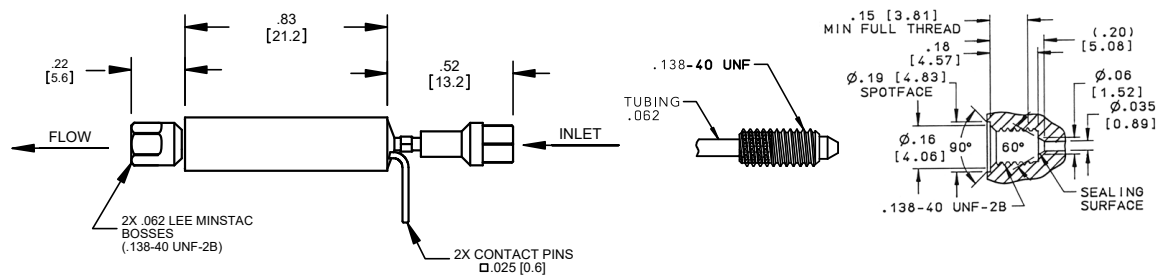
Technical drawings of the MINSTAC VHS type solenoid valve (left), standard MINSTAC 062 tube with fitting (middle) and a cross section of the corresponding internal threading and hole shape (right) [64, B3, L4, L8]. All dimensions are in inches [mm].
